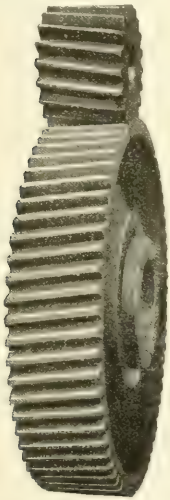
HELICAL GEAR AND PINION AFTER RUNNING APPROXIMATELY 300,000 CAR MILES
